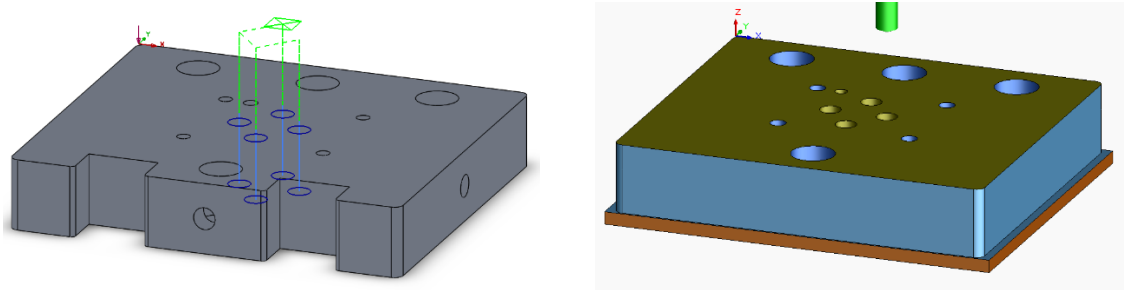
Drill D03 port holes (a) tool path (b) machined result
